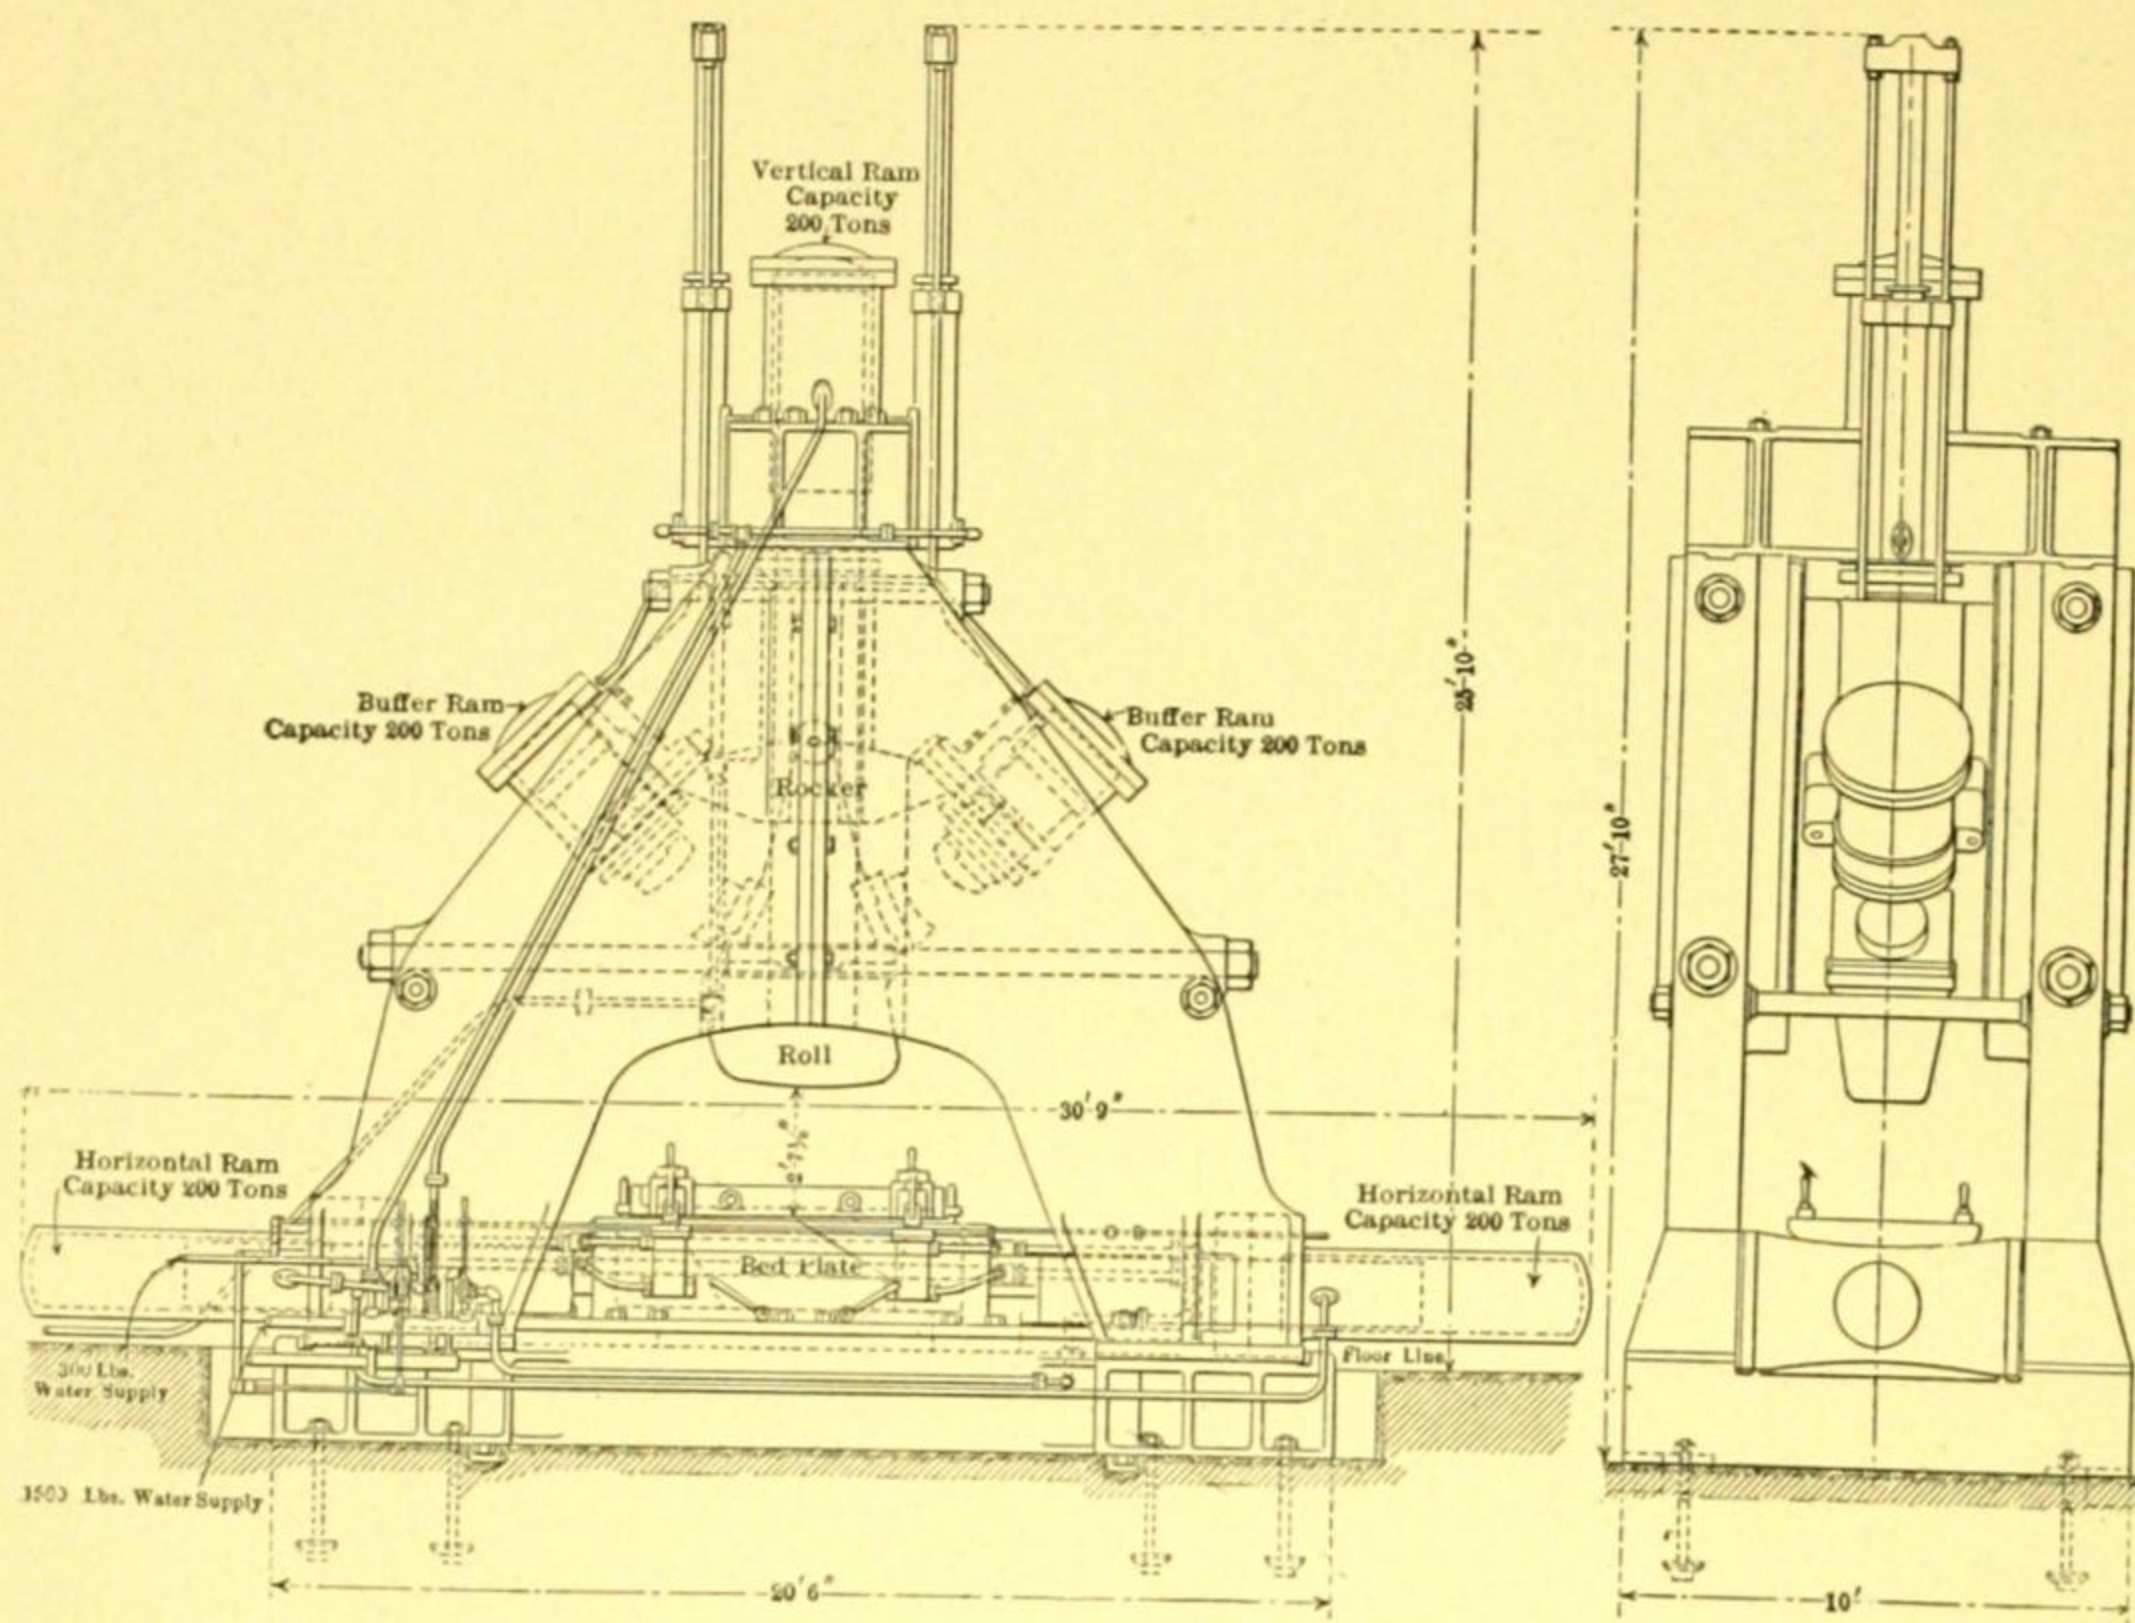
Side and End Elevations of the Rocker-Roller Press, Showing the Details of Construction and Principal Dimensions
